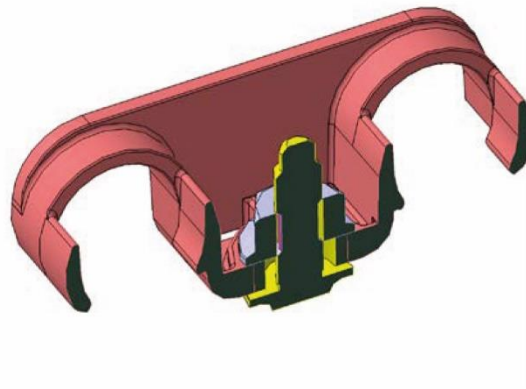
Mounting a plastic holder on a threaded bolt and a flange nut.
